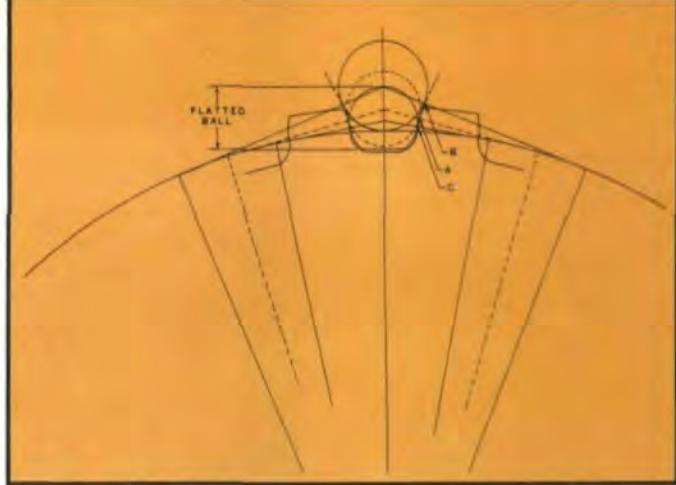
In this example, the first standard increment larger than the exact ball contacts outside the outside circle limit; the next size smaller contacts the root circle. The ball must be flattened to get a good measurement. This happens with stub tooth gears with low pressure angle.
